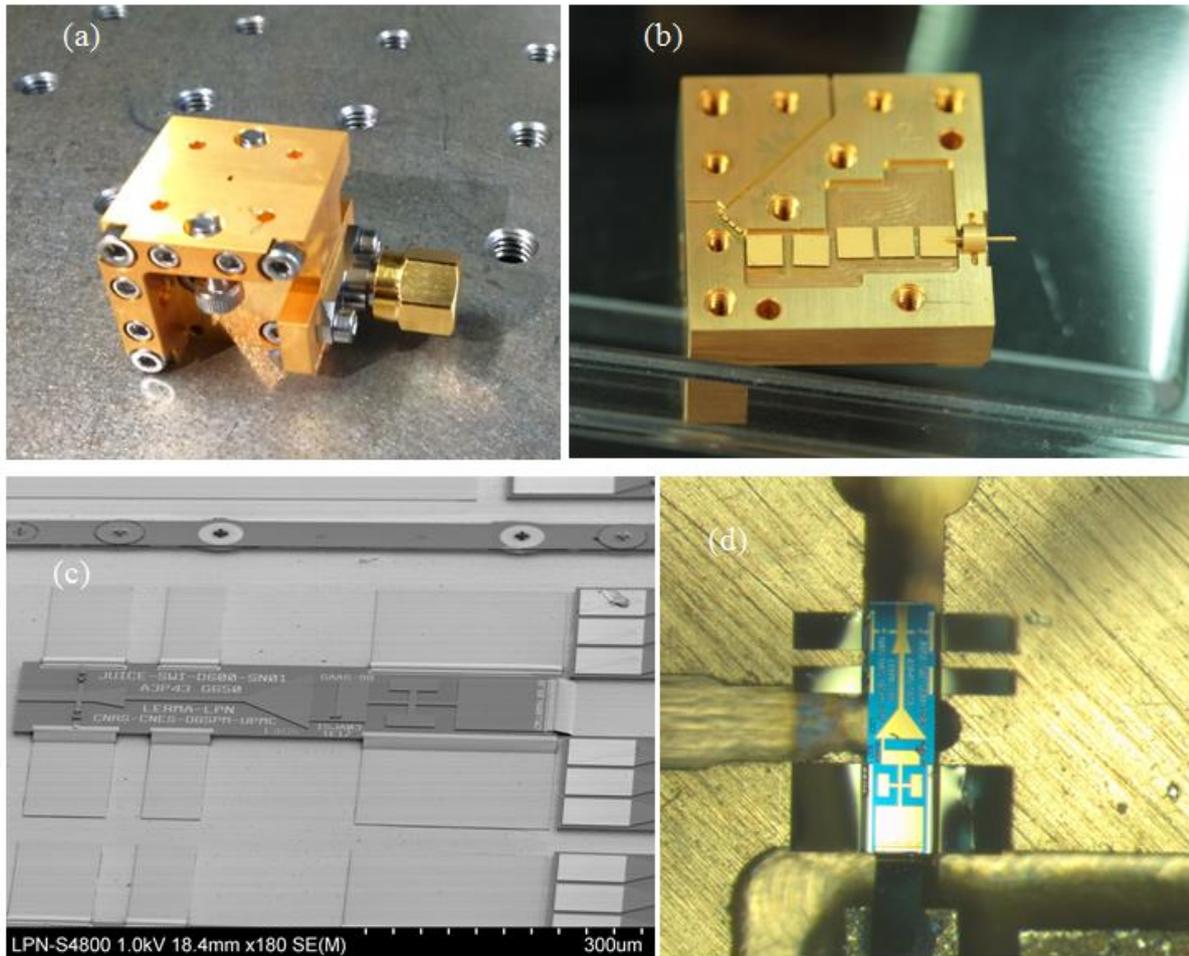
(a) and (b) Photographs of 600GHz doubler block fabricated by SAP-micro before assembly. (c) Photography of the MMIC chip of the 600 GHz two anodes doubler fabricated by LPN before releasing them from the wafer. (d) MMIC chip at 600 GHz mounted in the mechanical block.
